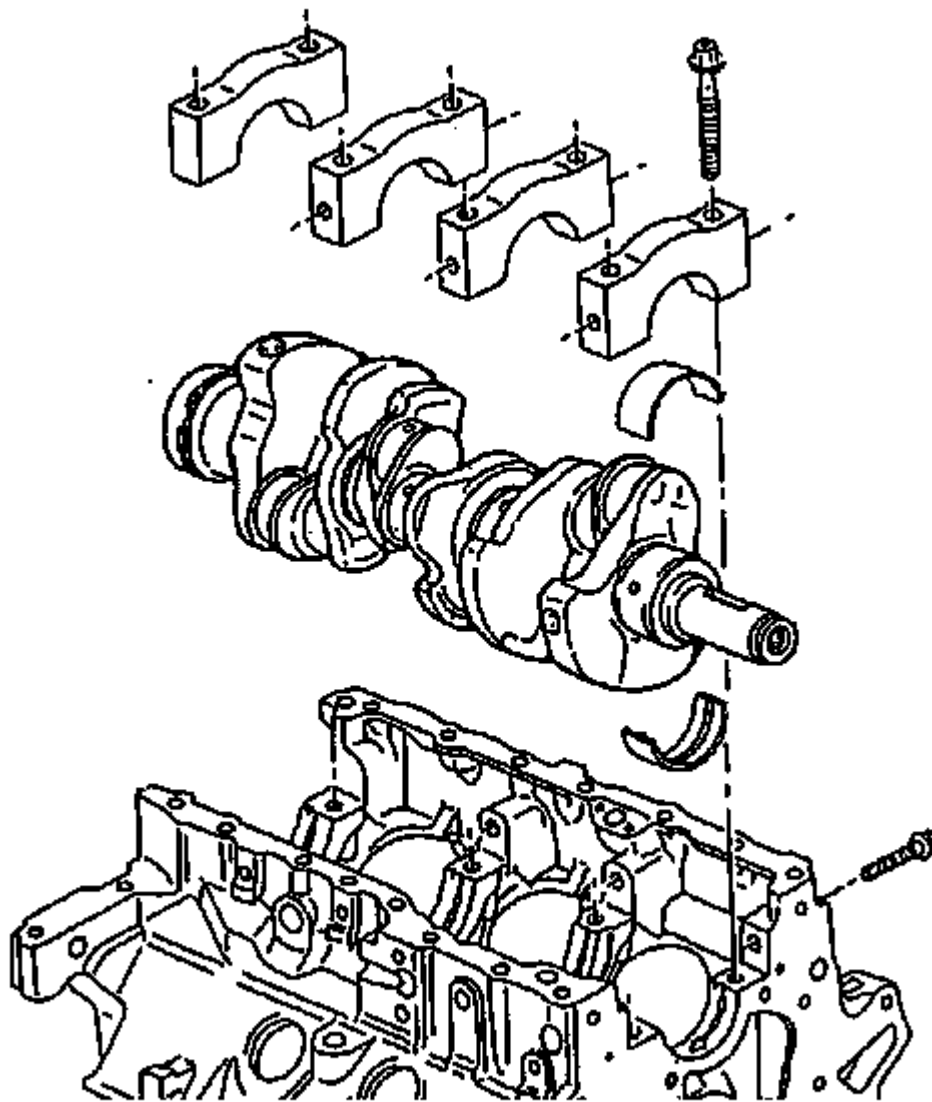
View Of Crankshaft, Bearings And Bearing Caps
